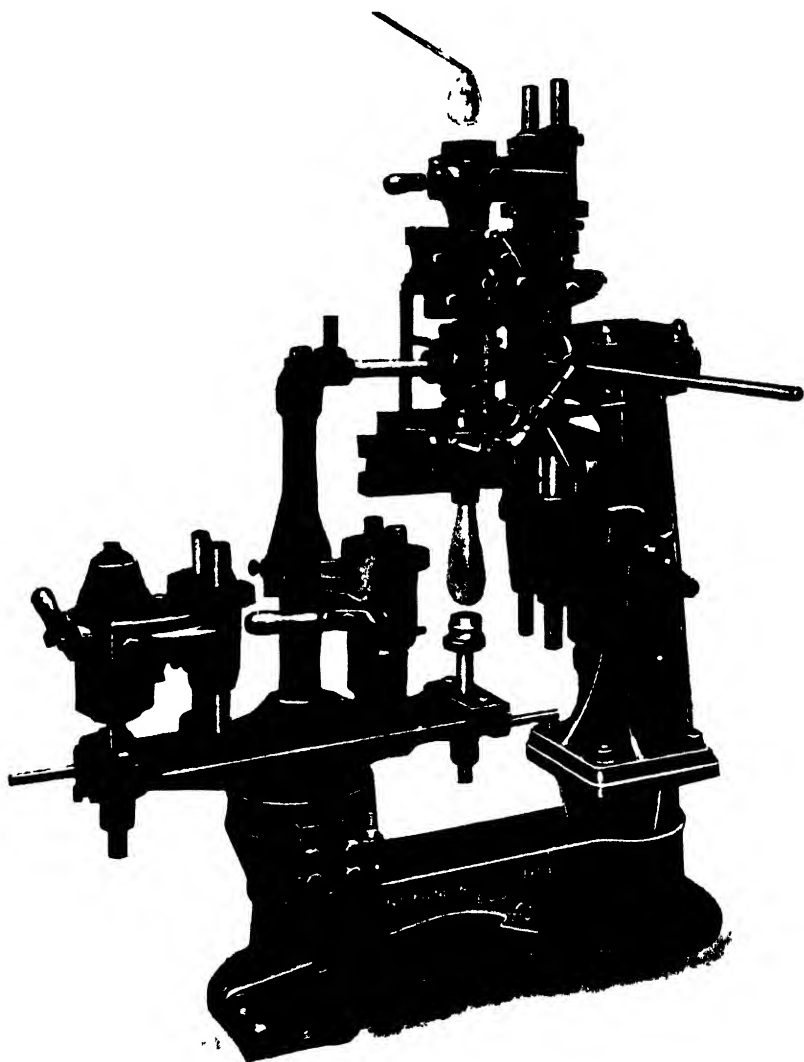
THE KILNER MACHINE (TURN-OVER TYPE).
